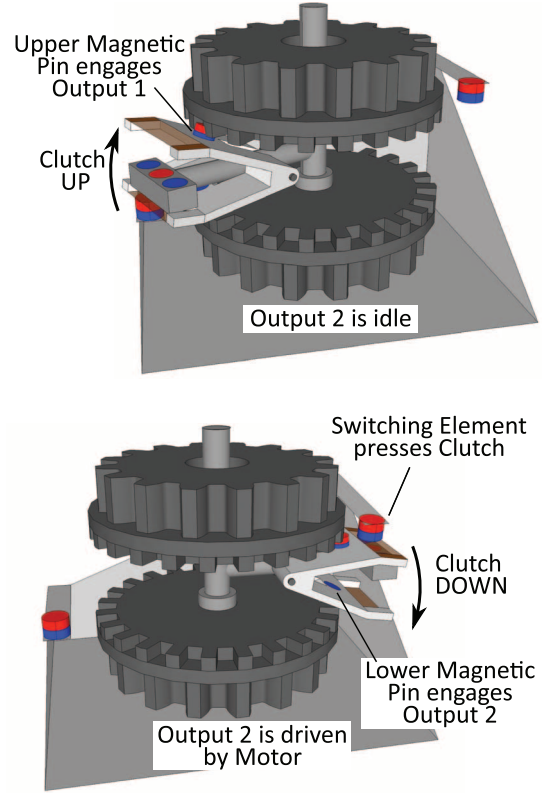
Working principle of the DRS prototype. *Top*: When the bi-stable clutch is up, the magnetic pin engages the lower steel teeth of Output 1 and transfers motor torque to Output 1. *Bottom*: When the forcing magnets (rigidly connected to the drive shaft) are passed slowly by a switching element, they force a large amplitude response in the switching element, which in turn contacts the clutch. The clutch moves down, and Output 2 is driven.
